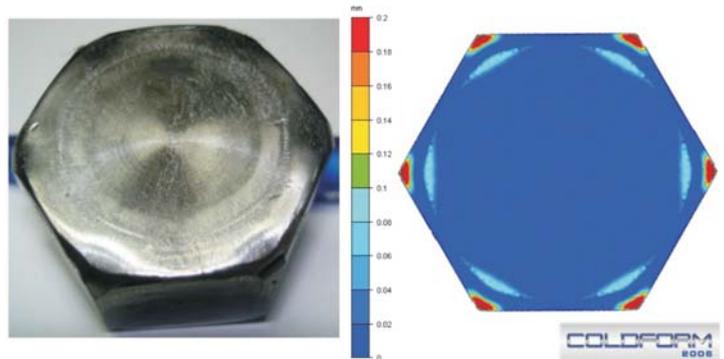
Union - Laps on the outer and inner edge of the bottom surface
